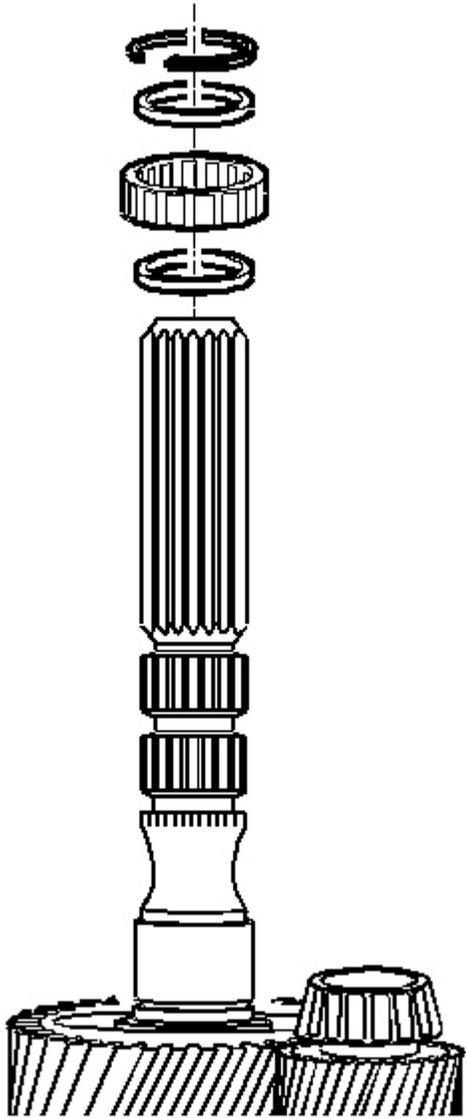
View Of Mainshaft Rear Roller Bearing, Rear Bearing Retainer Ring & Spacers
